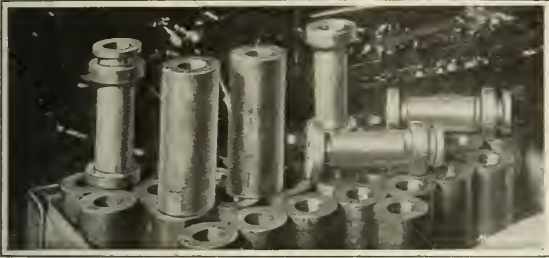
Double Bevel Pinions after First Lathe Operations have been performed
